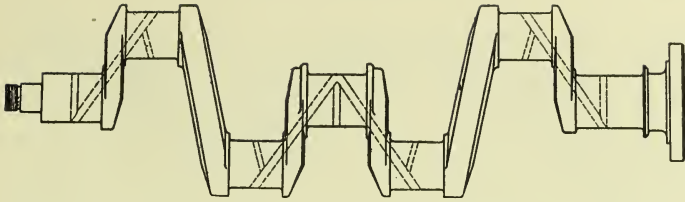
CRANKSHAFT IN WHICH OIL-HOLE LOCATION COULD BE CHANGED FOR THE EXPERIMENTS
